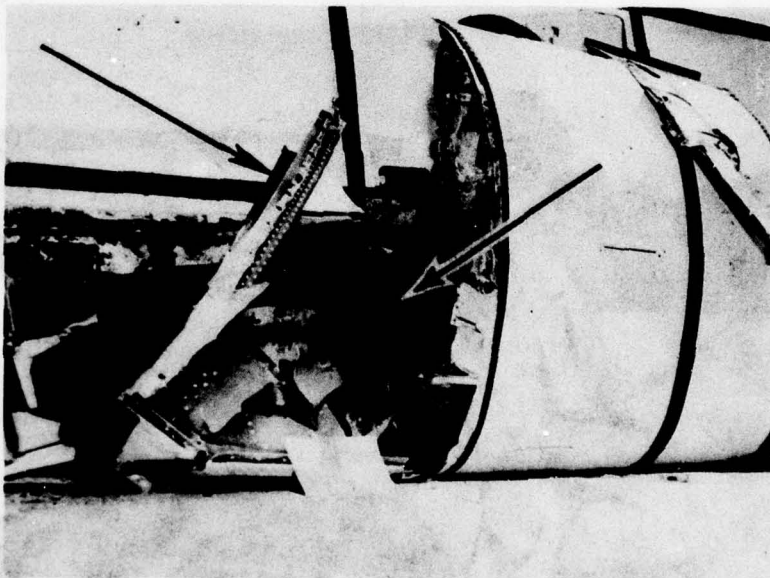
CH-47A Crash Test – Details of Torque Box Structural Failures at F.S. 482.
